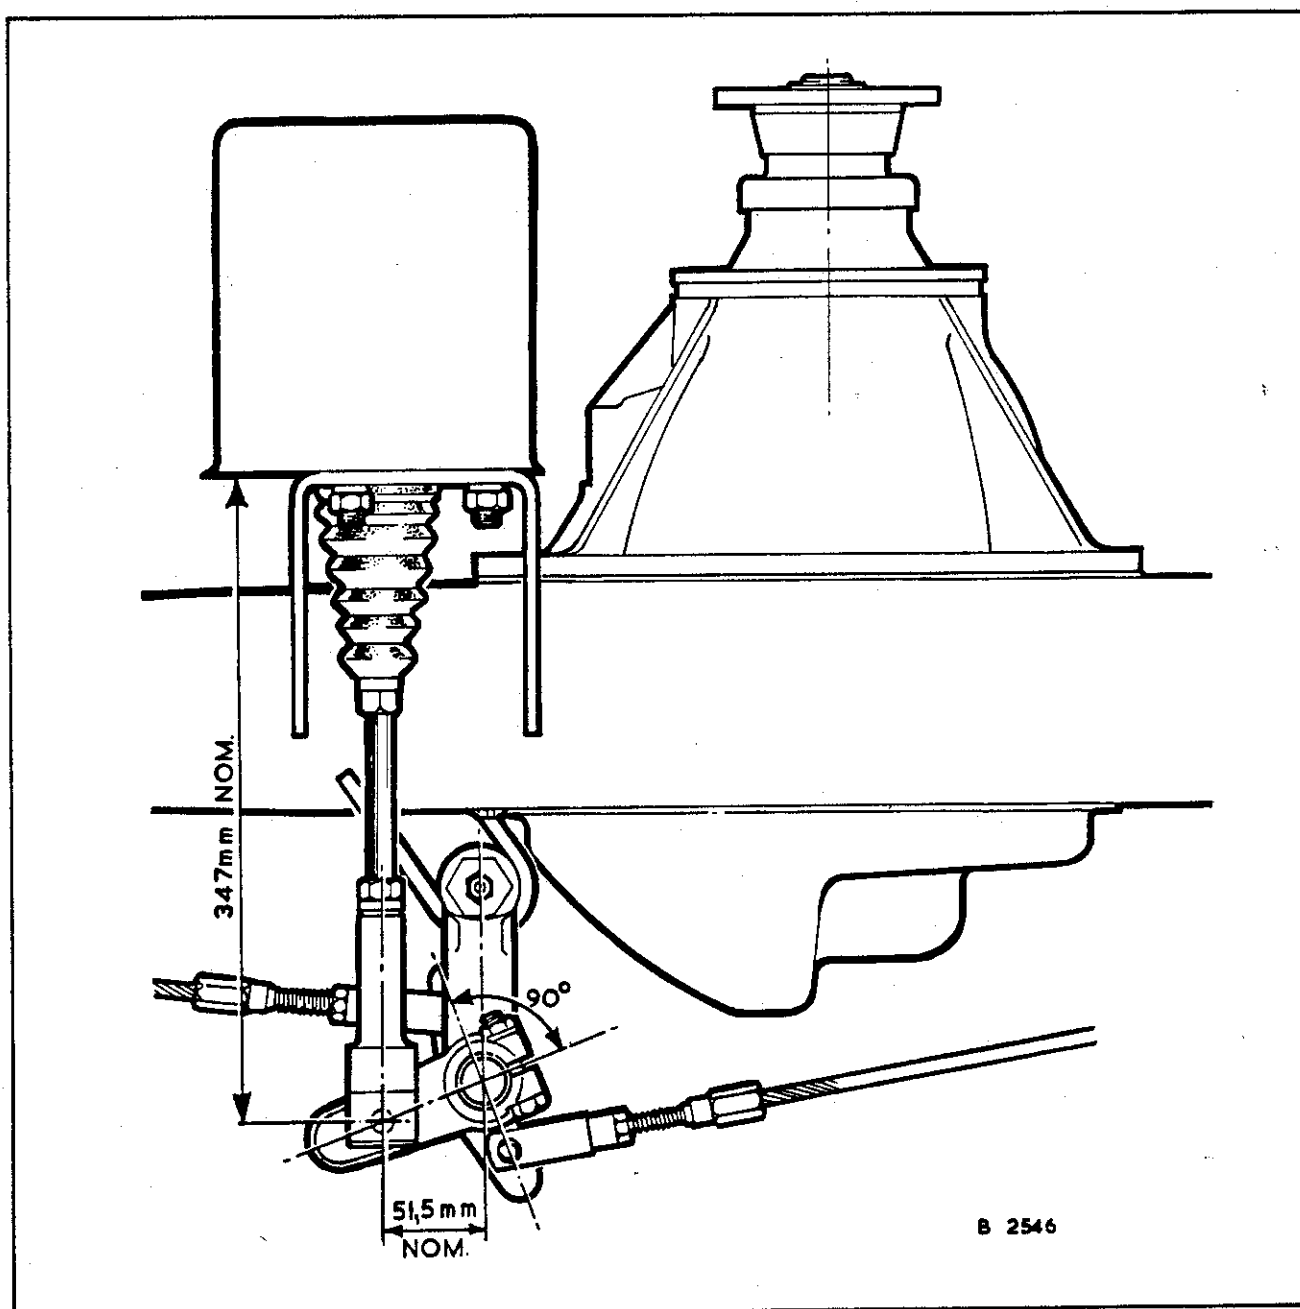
Adjustment of actuator pull rod and compensator mechanism.
